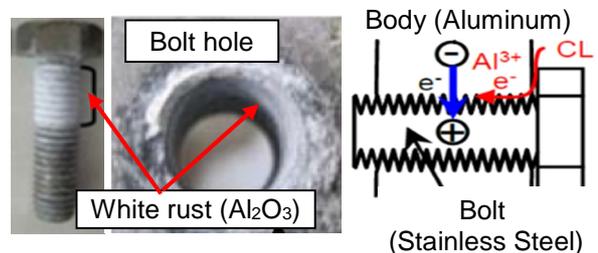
Bolt and Bolt Hole: Fig.15: Model of Bolt
